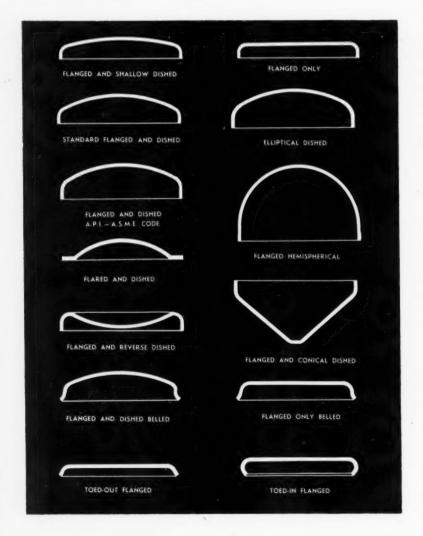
Cross-sectional Views of Standard Shapes of Heads that are Commonly Formed by Spinning
